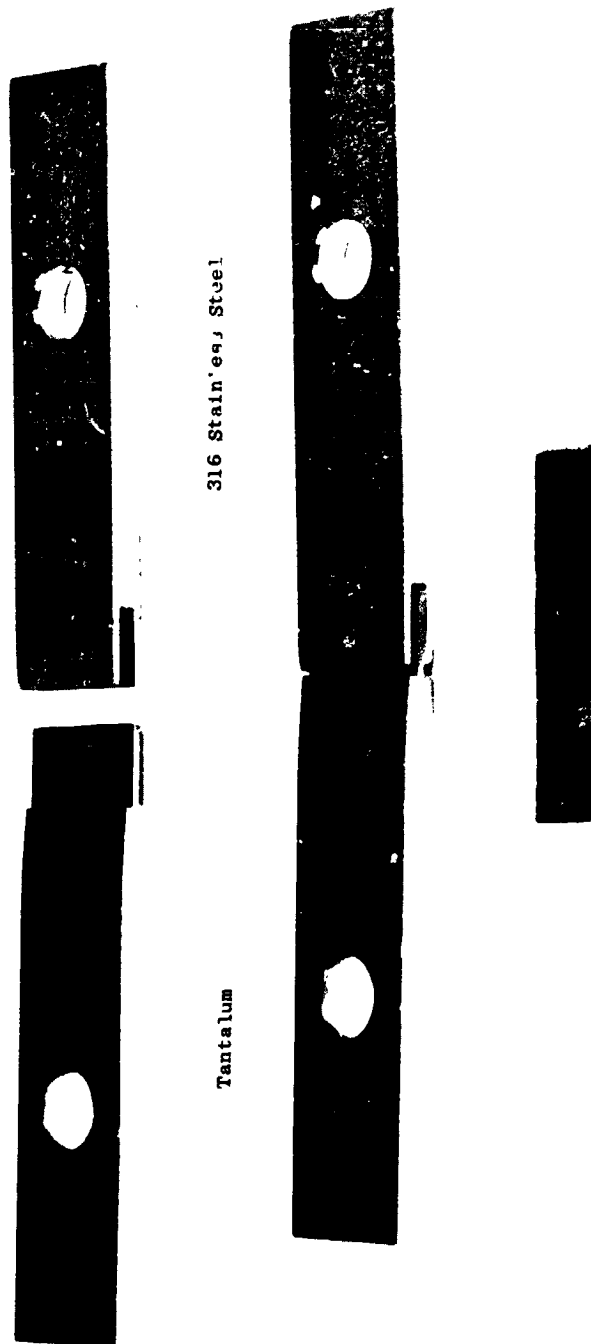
As-Machined Tongue-in-Groove Sheet Tensile Specimens. (P69-4-43A)
